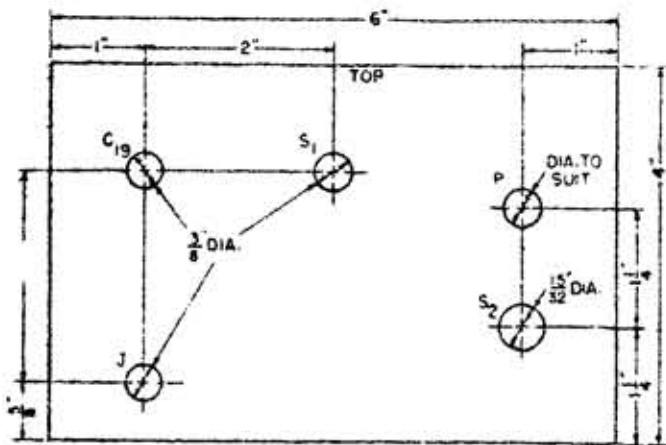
Layout dimensions for the front of the Signal Slicer. The dimension on the left which is blank should be  $1\frac{3}{4}$  inches. Note also that the holes for  $C_{19}$  and  $S_1$  are not shown in true perspective, because they are actually closer to the bottom of the panel than the hole for the panel light. The dimensions shown are correct.
